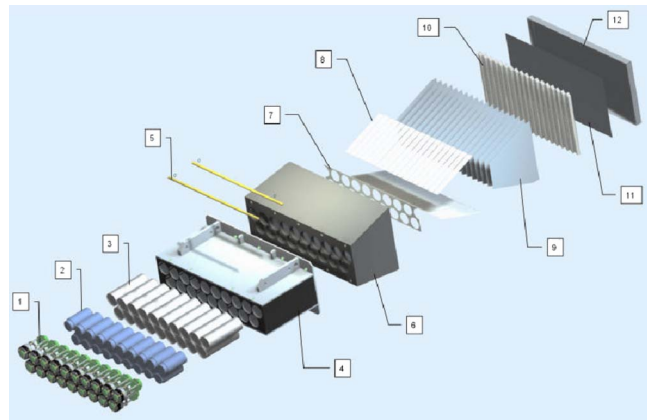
(Color online) Exploded view of the components that form a NIMROD wide angle detector module. The components are (1) electronics assemblies; (2) photomultiplier tubes; (3) mu-metal assemblies for magnetic screening; (4) upper molding; (5) mounting pins; (6) lower molding; (7) upper reflective layer (8) reflector backing plates; (9) dividing plates; (10) glass and scintillator assemblies; (11) foil lining; and (12) detector cover.
